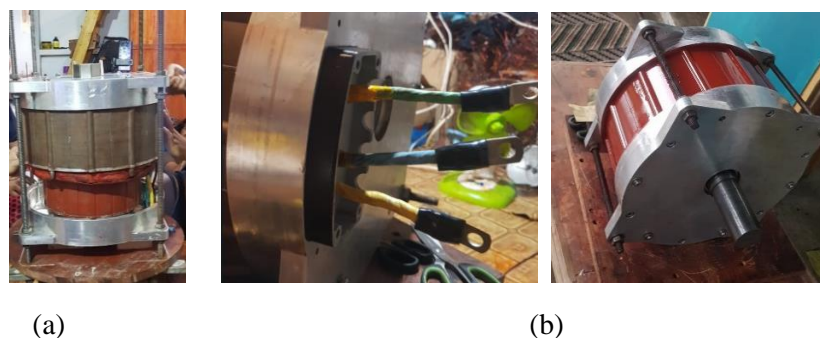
(a) Assembly process, (b) finishing process-installing output cable and insulation coating.
